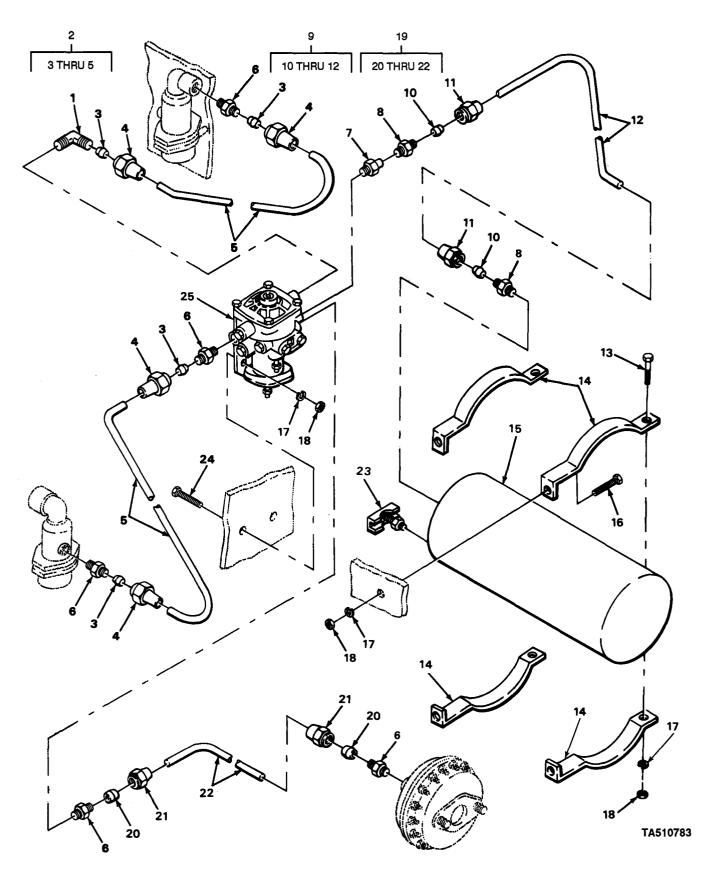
AIR TANK, EMERGENCY VALVE, LINES, AND FITTINGS.
